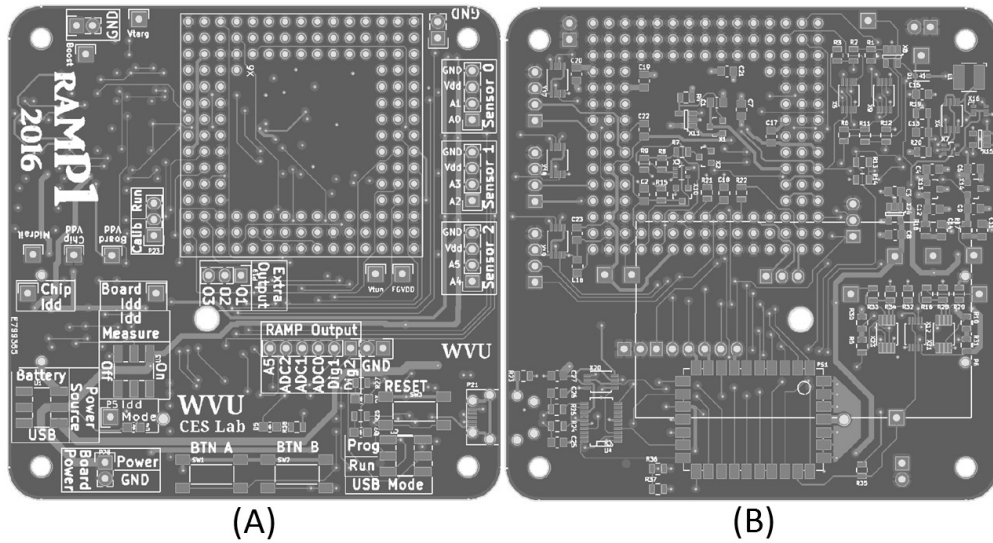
(A) Front side of new PCB. (B) Back side of new PCB.
